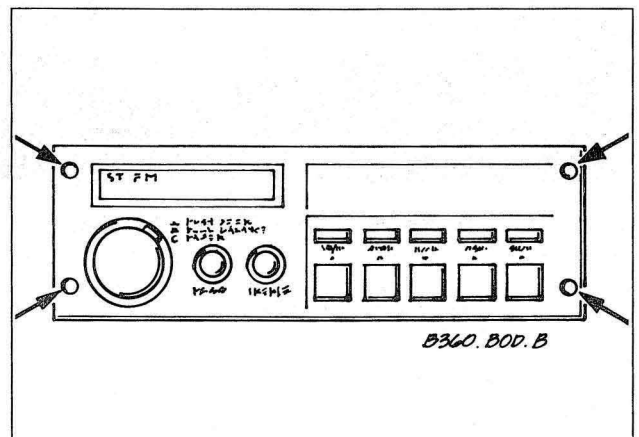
Access holes (arrows) for retaining clips of early BMW radios. Release clips by inserting stiff wire in holes.
